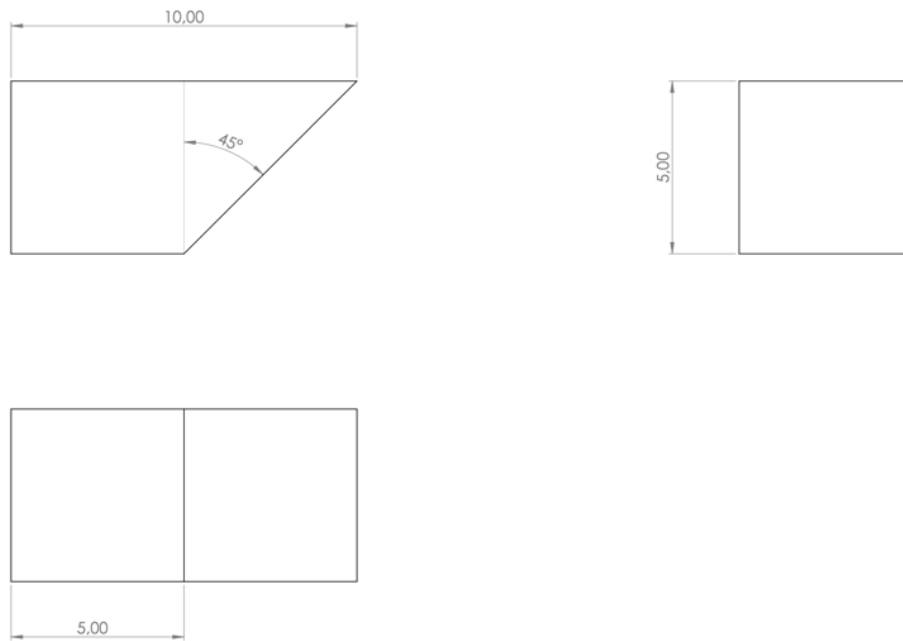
Technical drawing of the specimen with overhang angle of 45°
